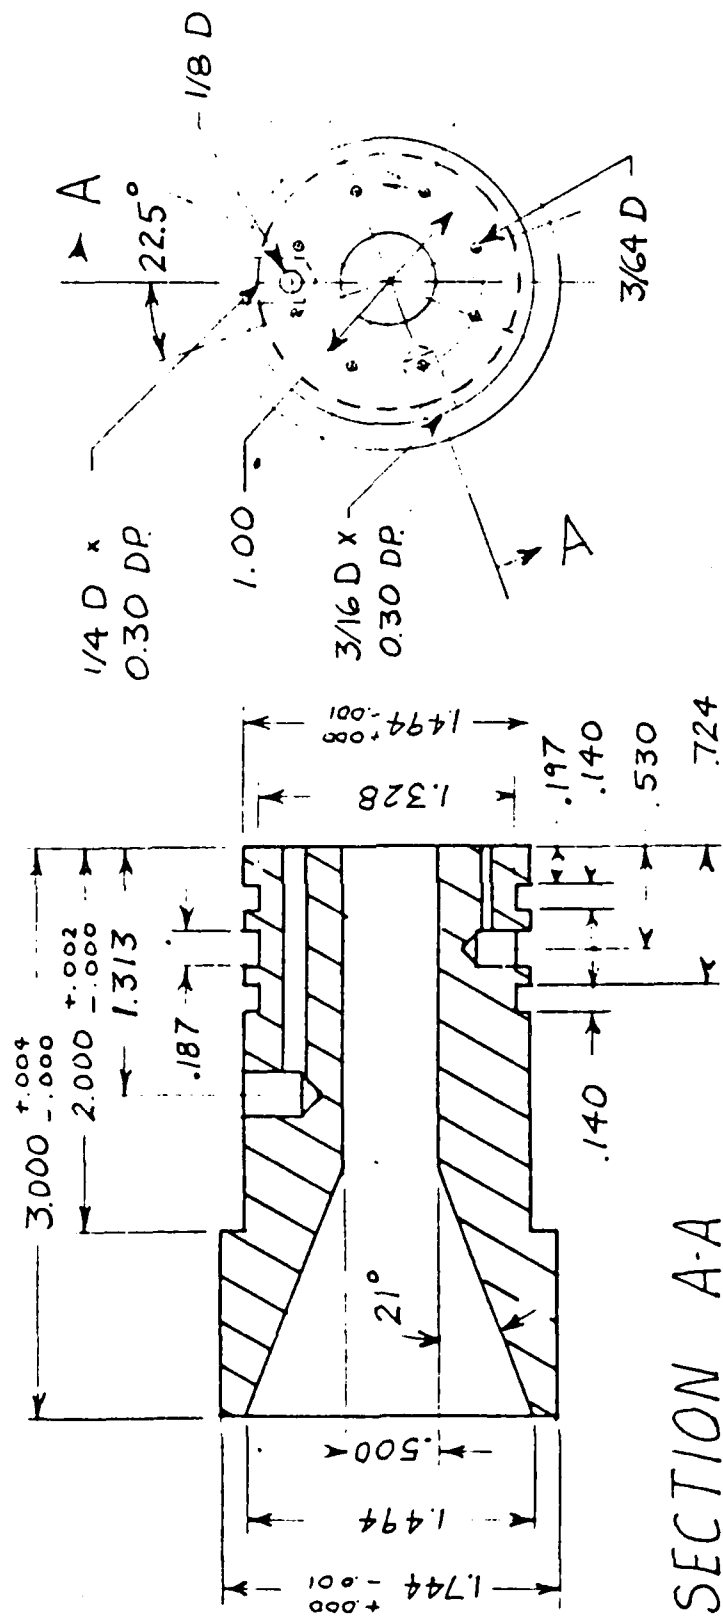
Drawing of Step Insert for Gaseous Injection.
